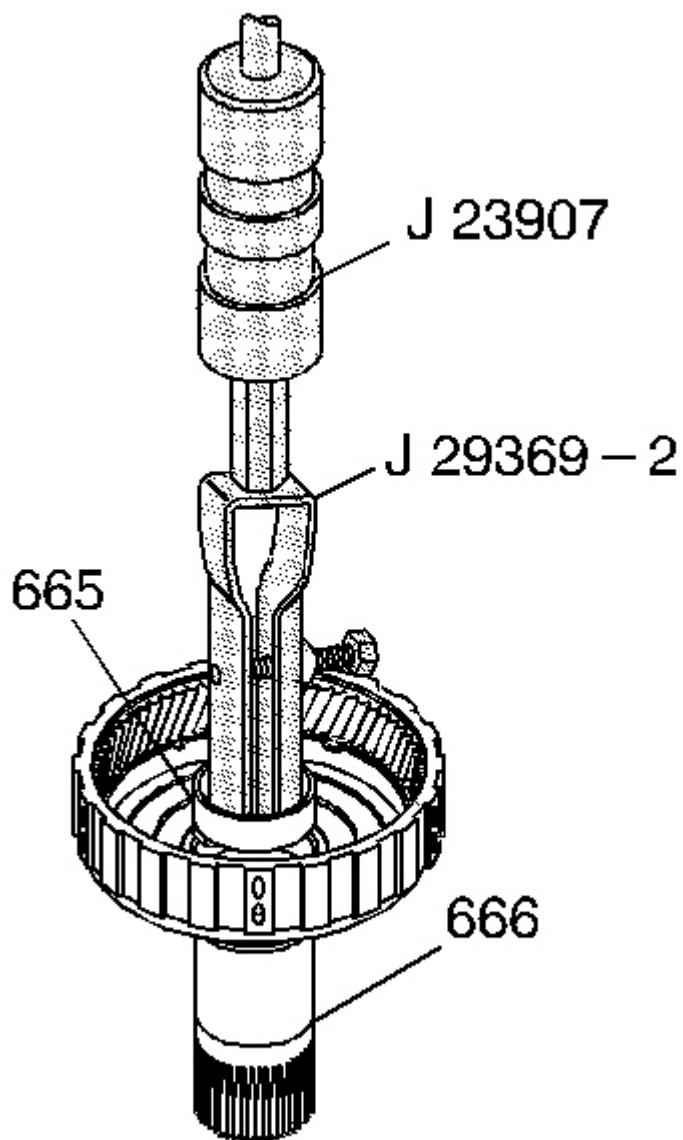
Removing Reaction Carrier Shaft Front Bushing
